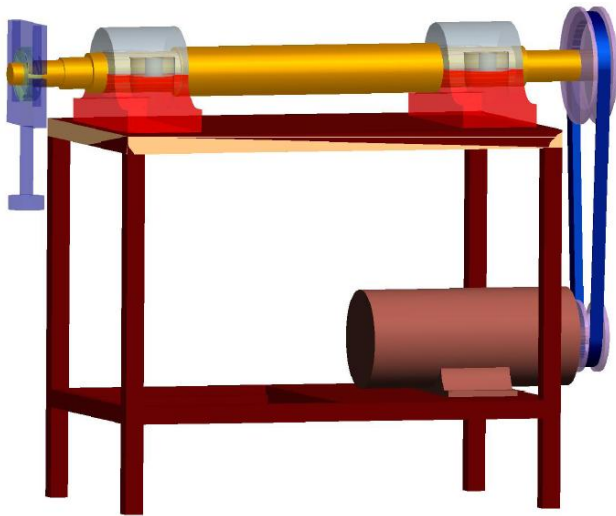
Solid model of assembly drawing using Pro-E modeling software (view 1) [10].
